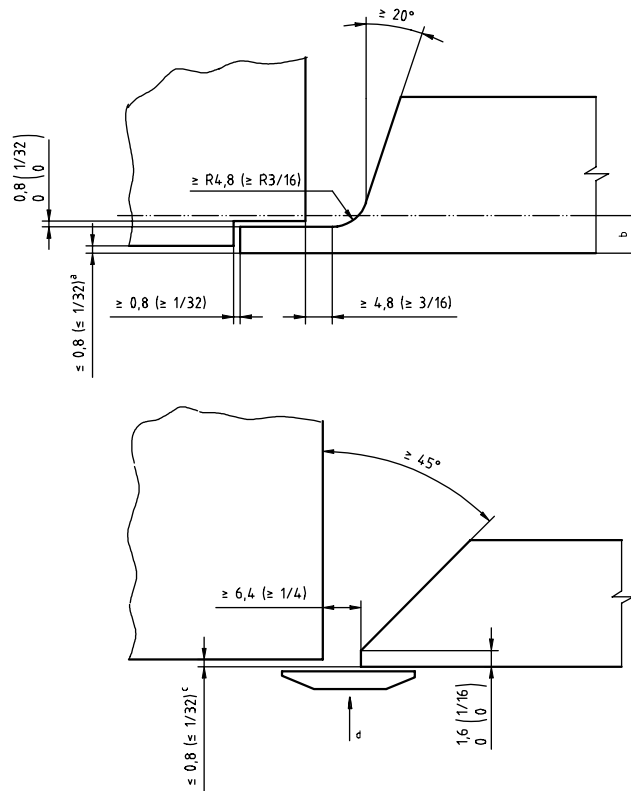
Typical Weld Grooves for Pipe Butt Joints
